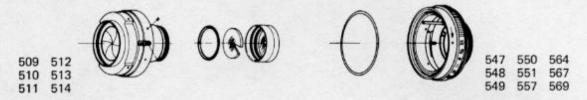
A. Diaphragm Housing Assemblies and Mount Assemblies
